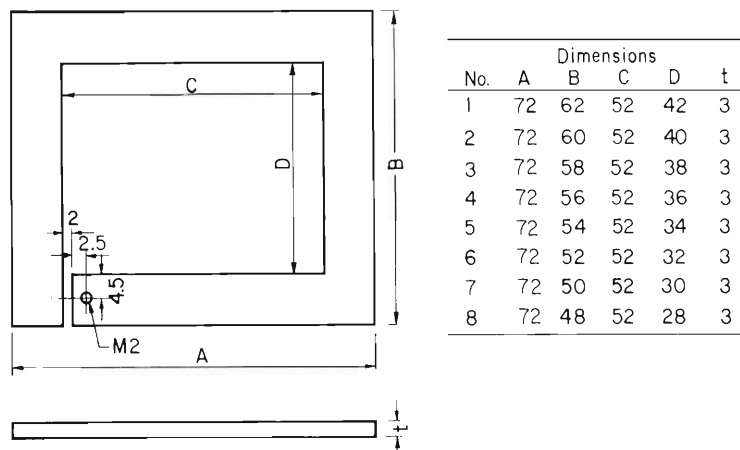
Dimensions of copper frames which form together a 7-turn coil of a pole of the shortest drift tube quadrupole magnet.
